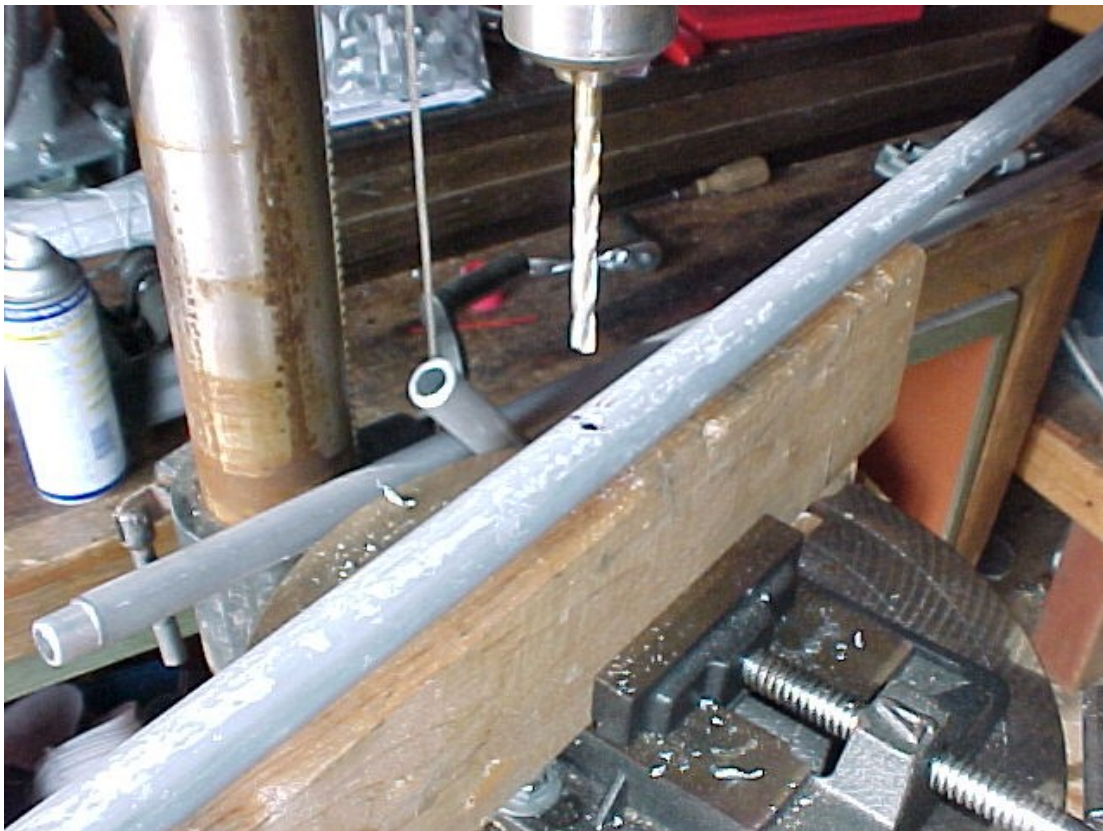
For the director inserts and the reflector sleeve I drilled one hole based on a measurement from the center.
